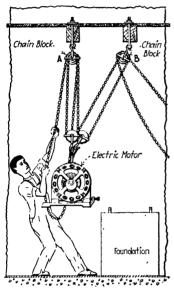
Method of placing a machine on a foundation with two chain blocks. All the load is carried by tackle A. (See also Fig. 126.)
